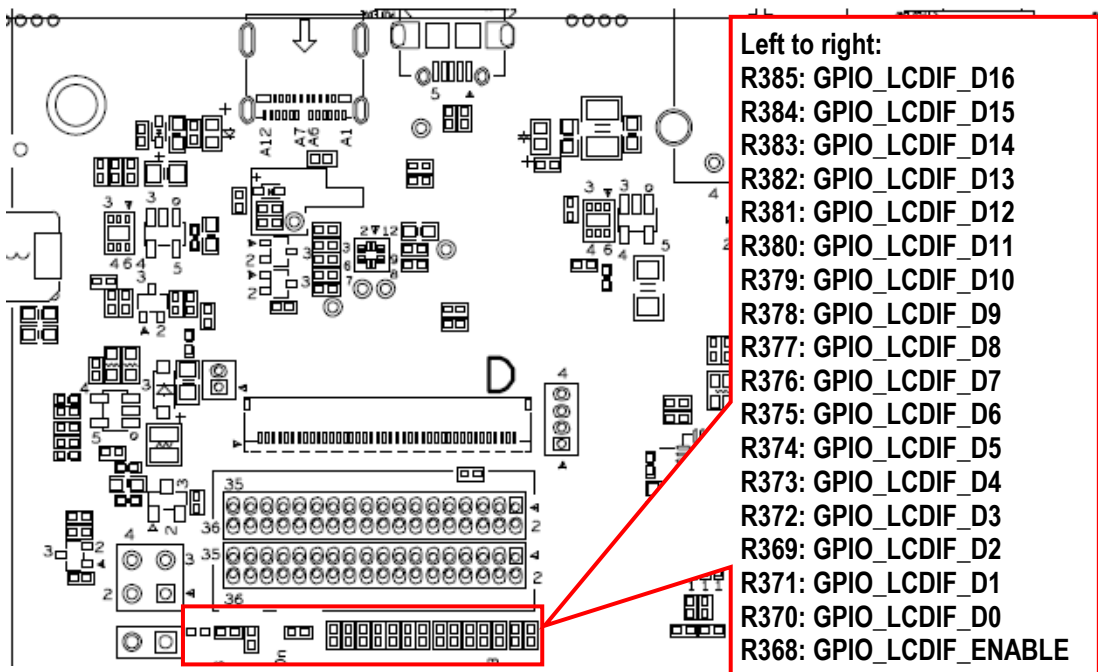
uCOM Carrier Board, rev B, GPIO Boot Control Selectors
